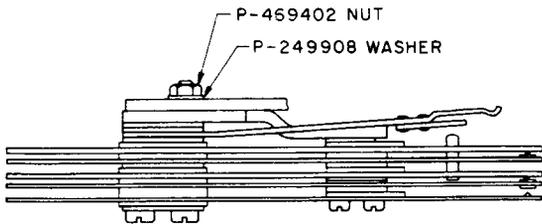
Bracket-Type Holding Off-Normal Spring Assembly
